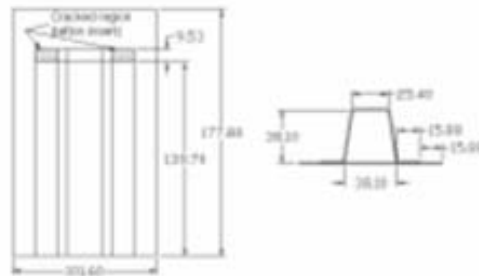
Skin-stringer geometry considered (all dimensions in mm)
